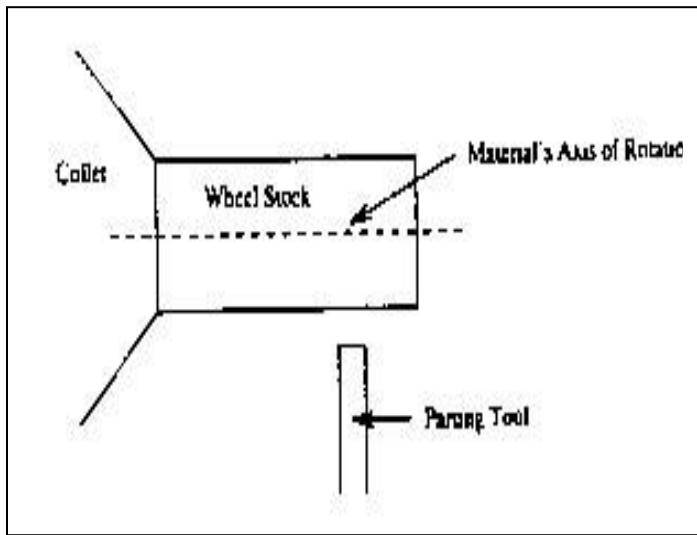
Aligning the Parting Tool So It Is Perpendicular.
